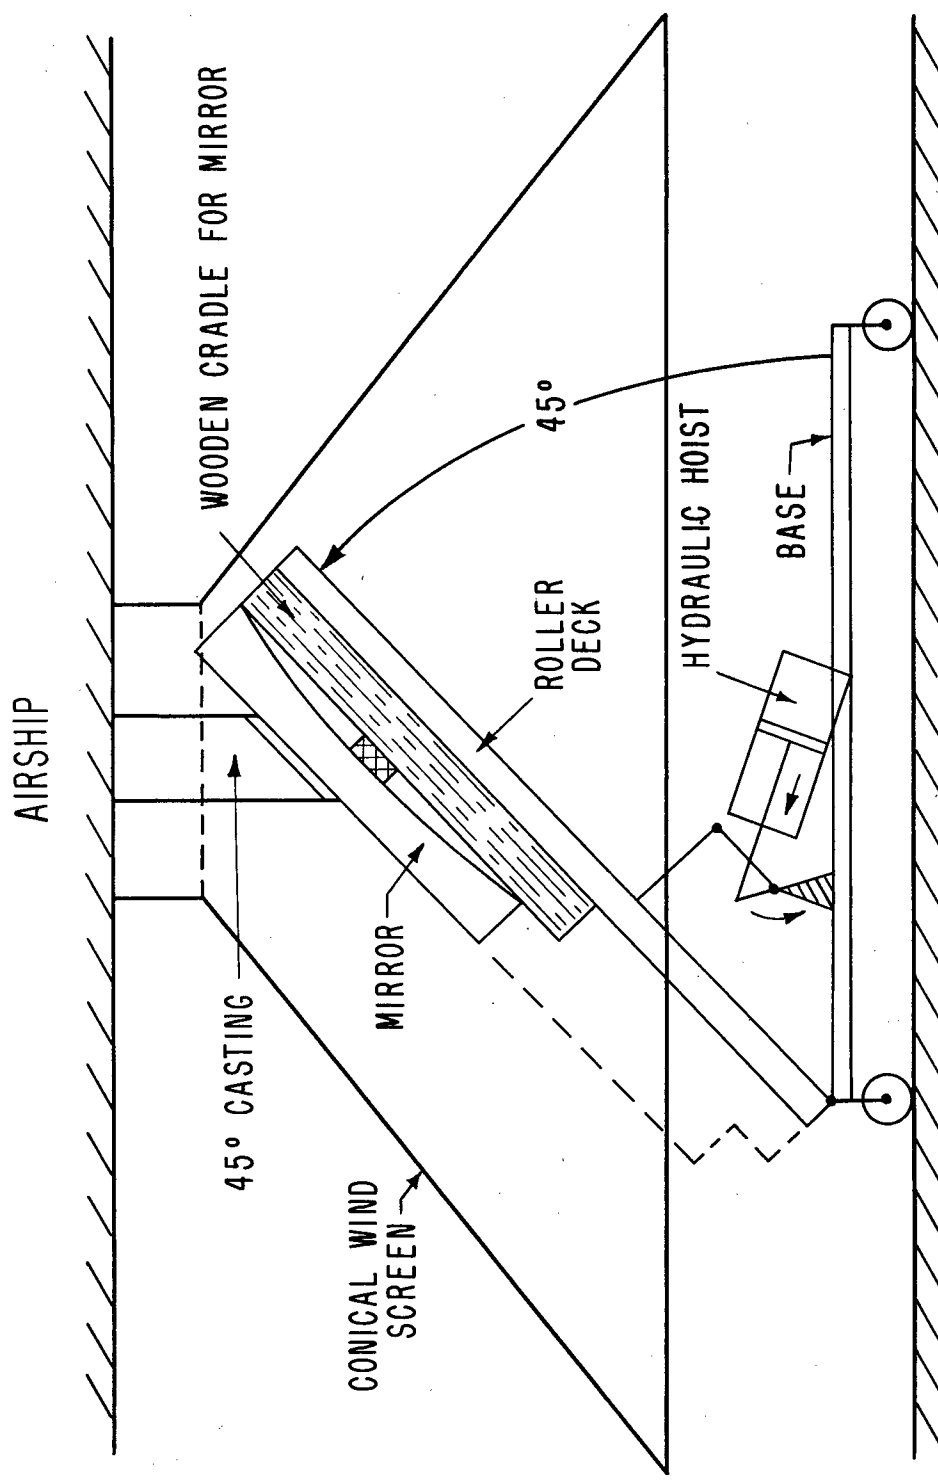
SCHEMATIC DRAWING SHOWING USE OF HYDRAULIC CARRIAGE TO INSTALL MIRROR IN AIRSHIP.
